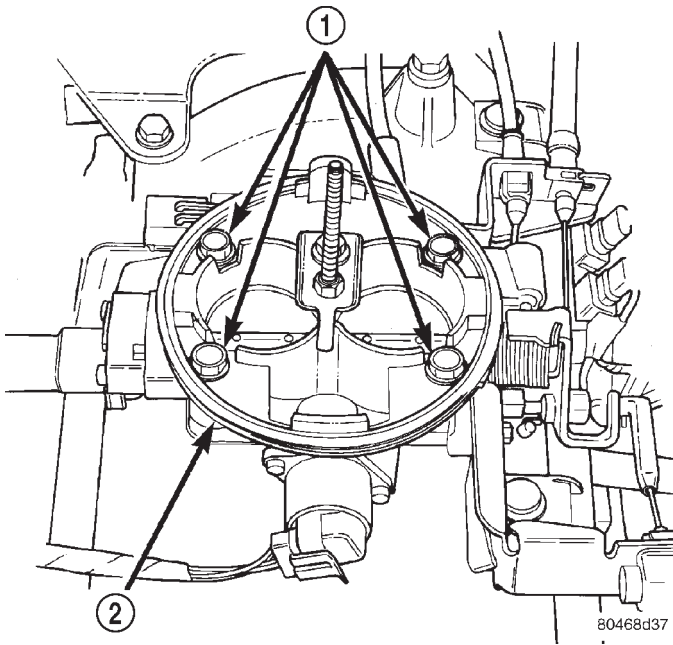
Throttle Body Mounting Bolts—3.9/5.2/5.9L Engines—Typical
